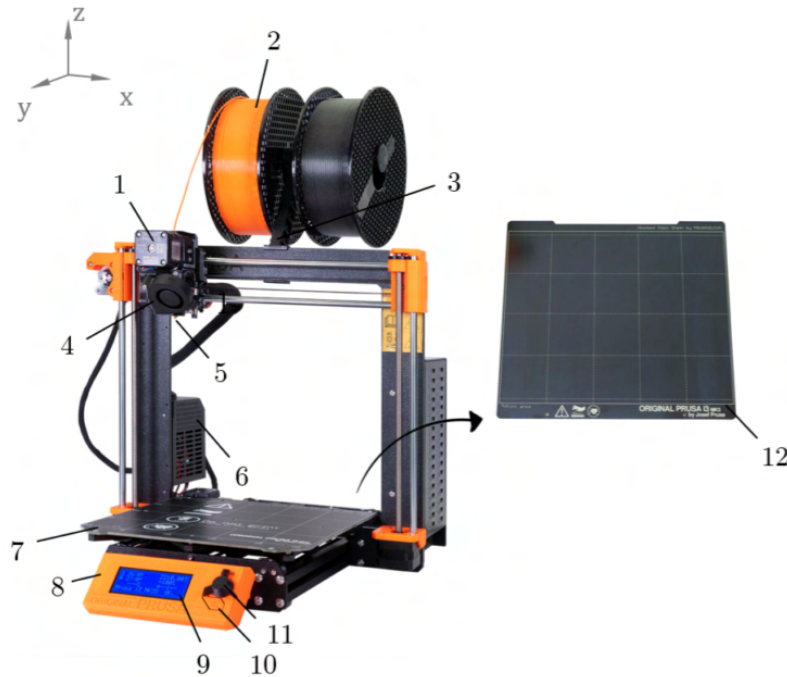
Structure of the 3D Printer *Original Prusa i3 MK3S+*: 1. Extruder motor; 2. Filament; 3. Filament Support; 4. Fan; 5. Extruder; 6. Motherboard; 7. Heating bed support; 8. Control Panel; 9. *Reset* Button; 10-11. Control Buttons; 12. Magnetic heating bed. [42]
